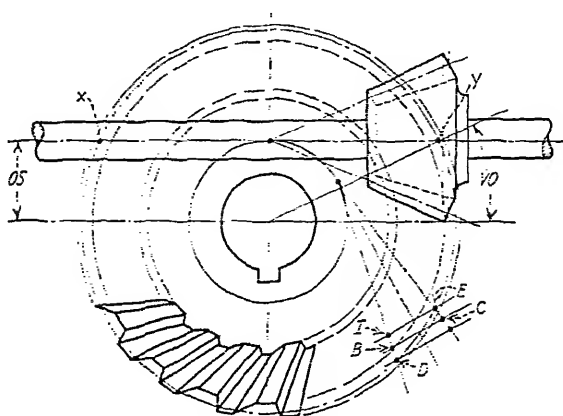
Plan of skew-bevel gear and straight-tooth pinion.
